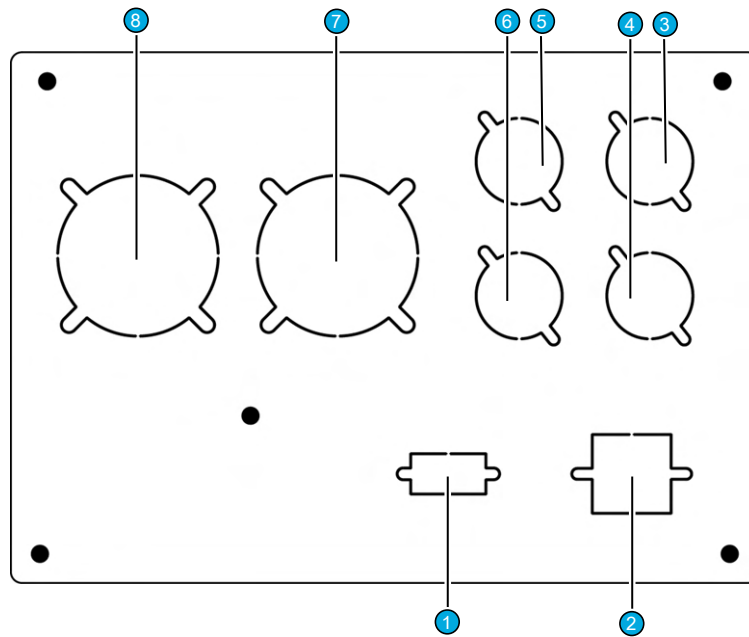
Connections / Interfaces - Machine Frame - to CrimpCenter
